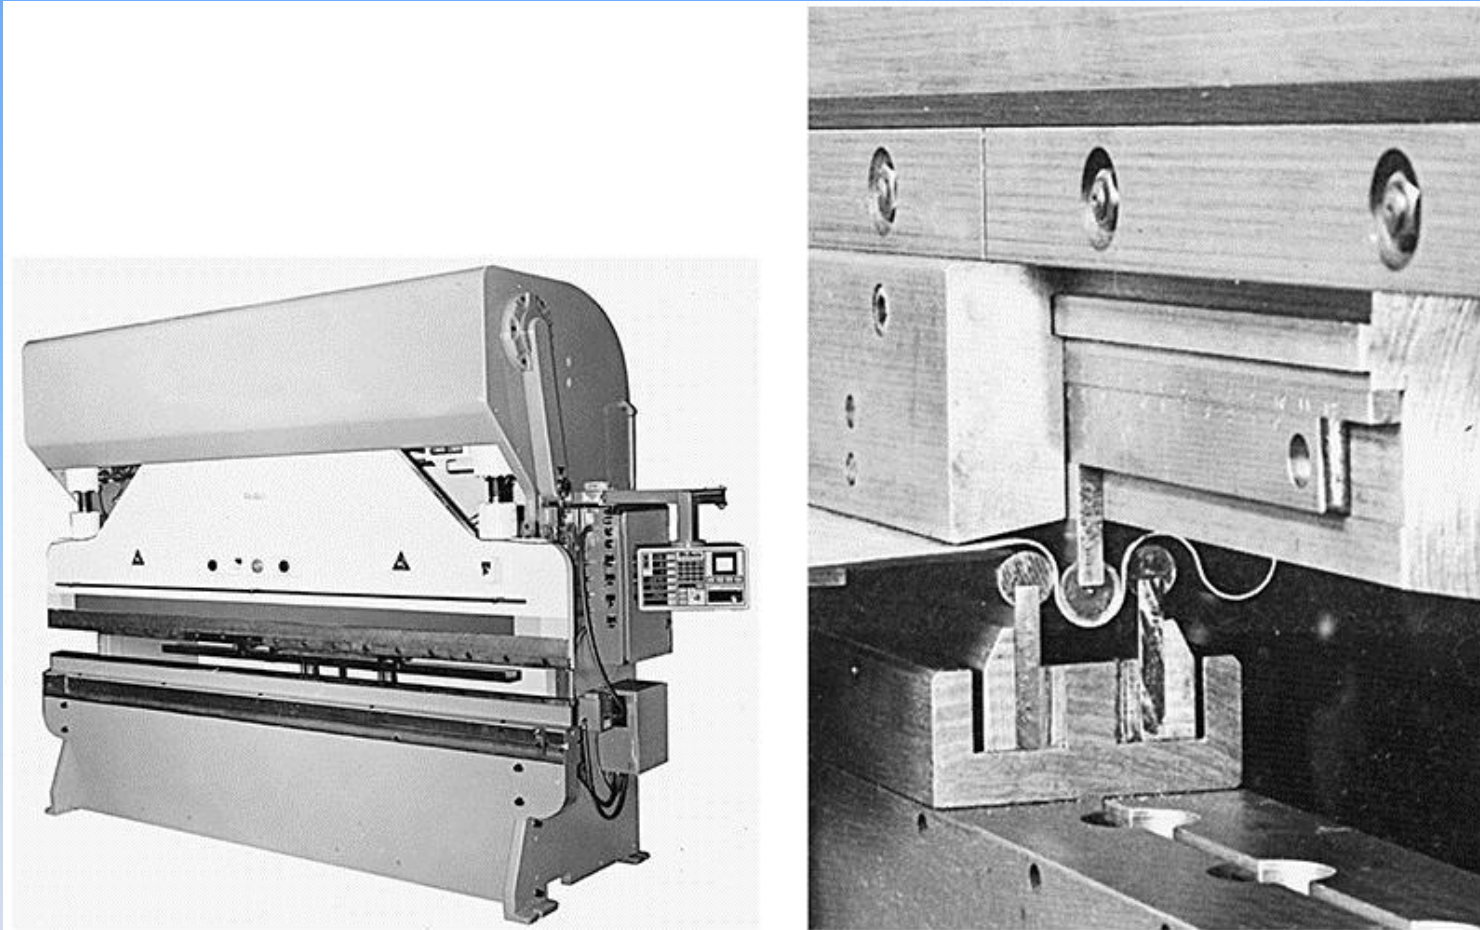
(Left) Press brake with CNC gauging system. (Courtesy of DiAcro Division, Acrotech Inc., Lake City, MN.) (Right) Close-up view of press brake dies forming corrugations. (Courtesy of Cincinnati Incorporated, Cincinnati, OH.)
